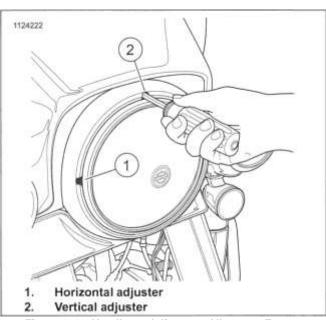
Headlamp Adjusters: All except Frame-Mounted Fairing (typical)
